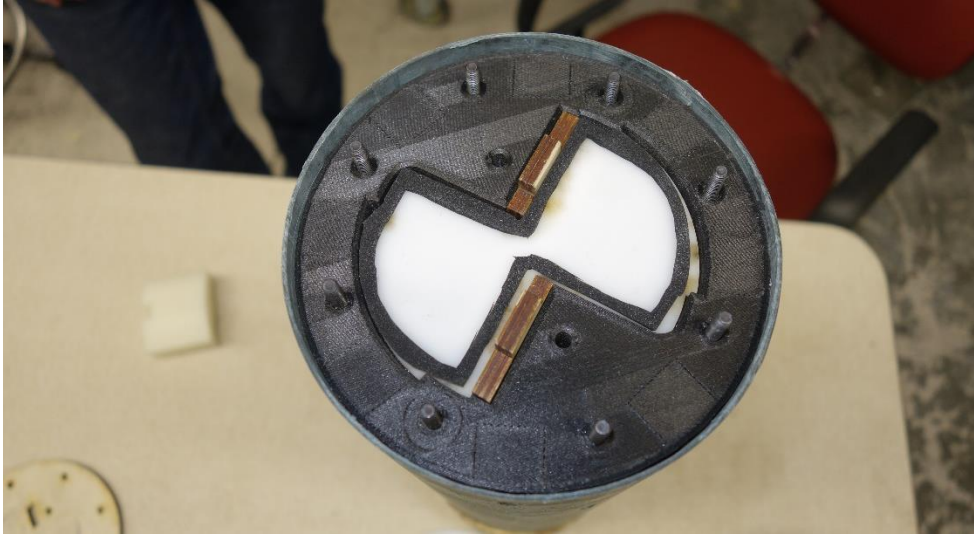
Assembly sequence, showing how the aluminum spine twists and locks into position within the printed core of the aft bulkhead. Lower plywood panel removed for clarity
